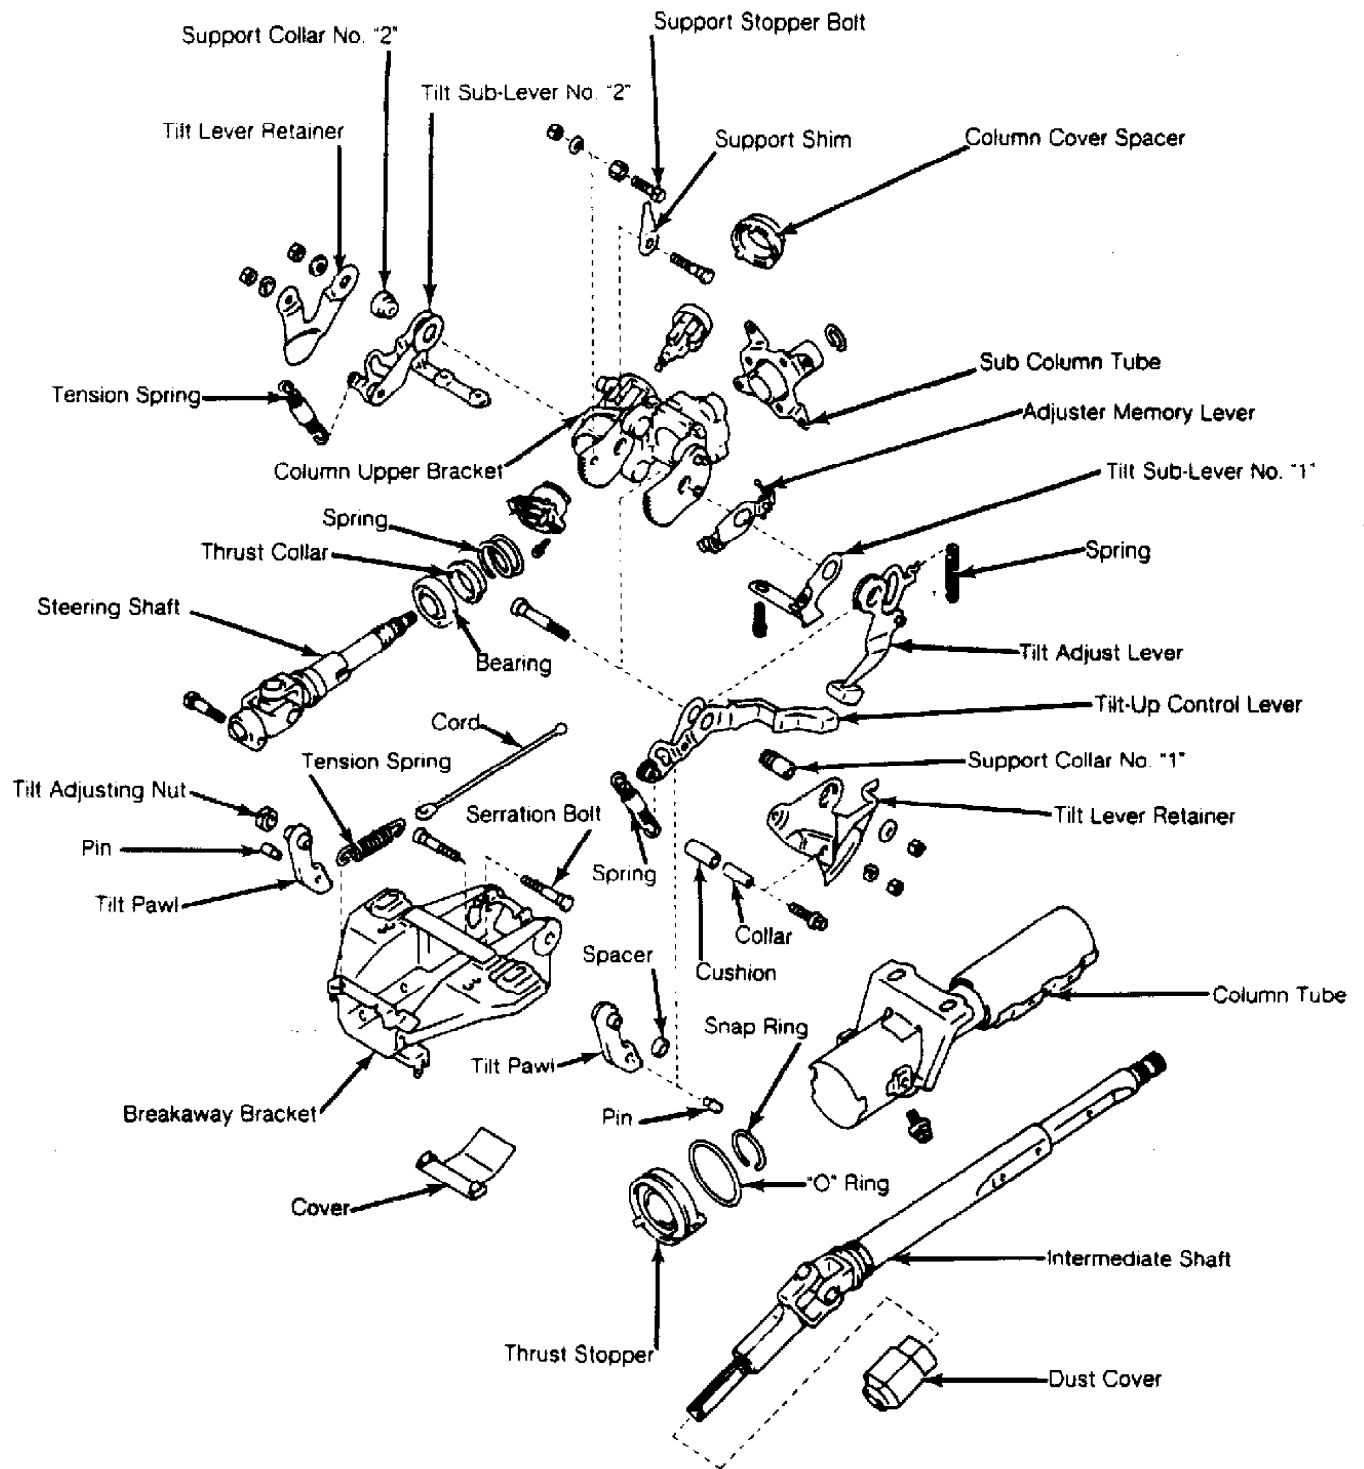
Exploded View of Celica, Cressida & Supra Steering Column Assembly
